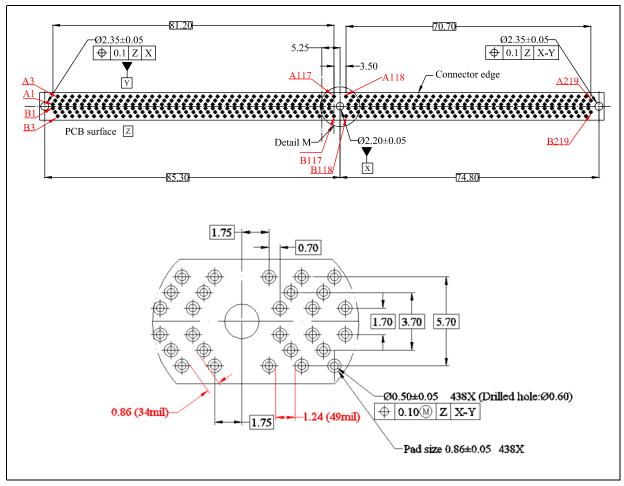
PCI e Riser Connector Footprint (Top View)
